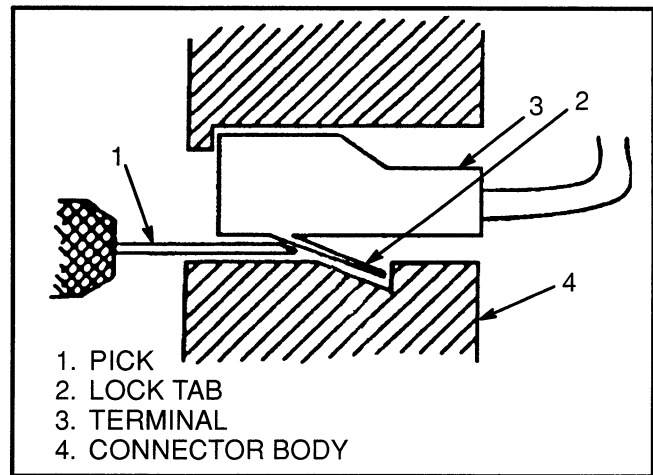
METRI-PACK “PUSH-TO-SEAT” CONNECTOR
